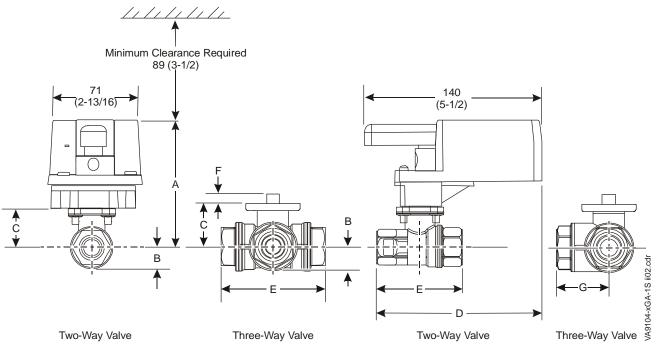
VA9104 Series Electric Non-Spring Return Valve Actuator Dimensions, mm (in.)
